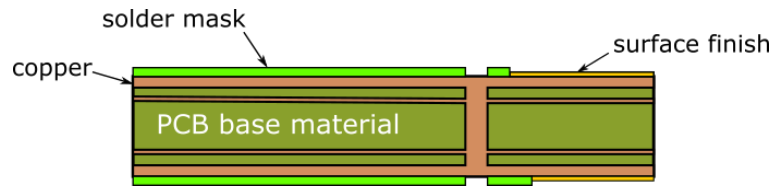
Exemplary PCB buildup comprised of base material, copper conducting layers with surface finish at exposed areas or covered with solder mask.
